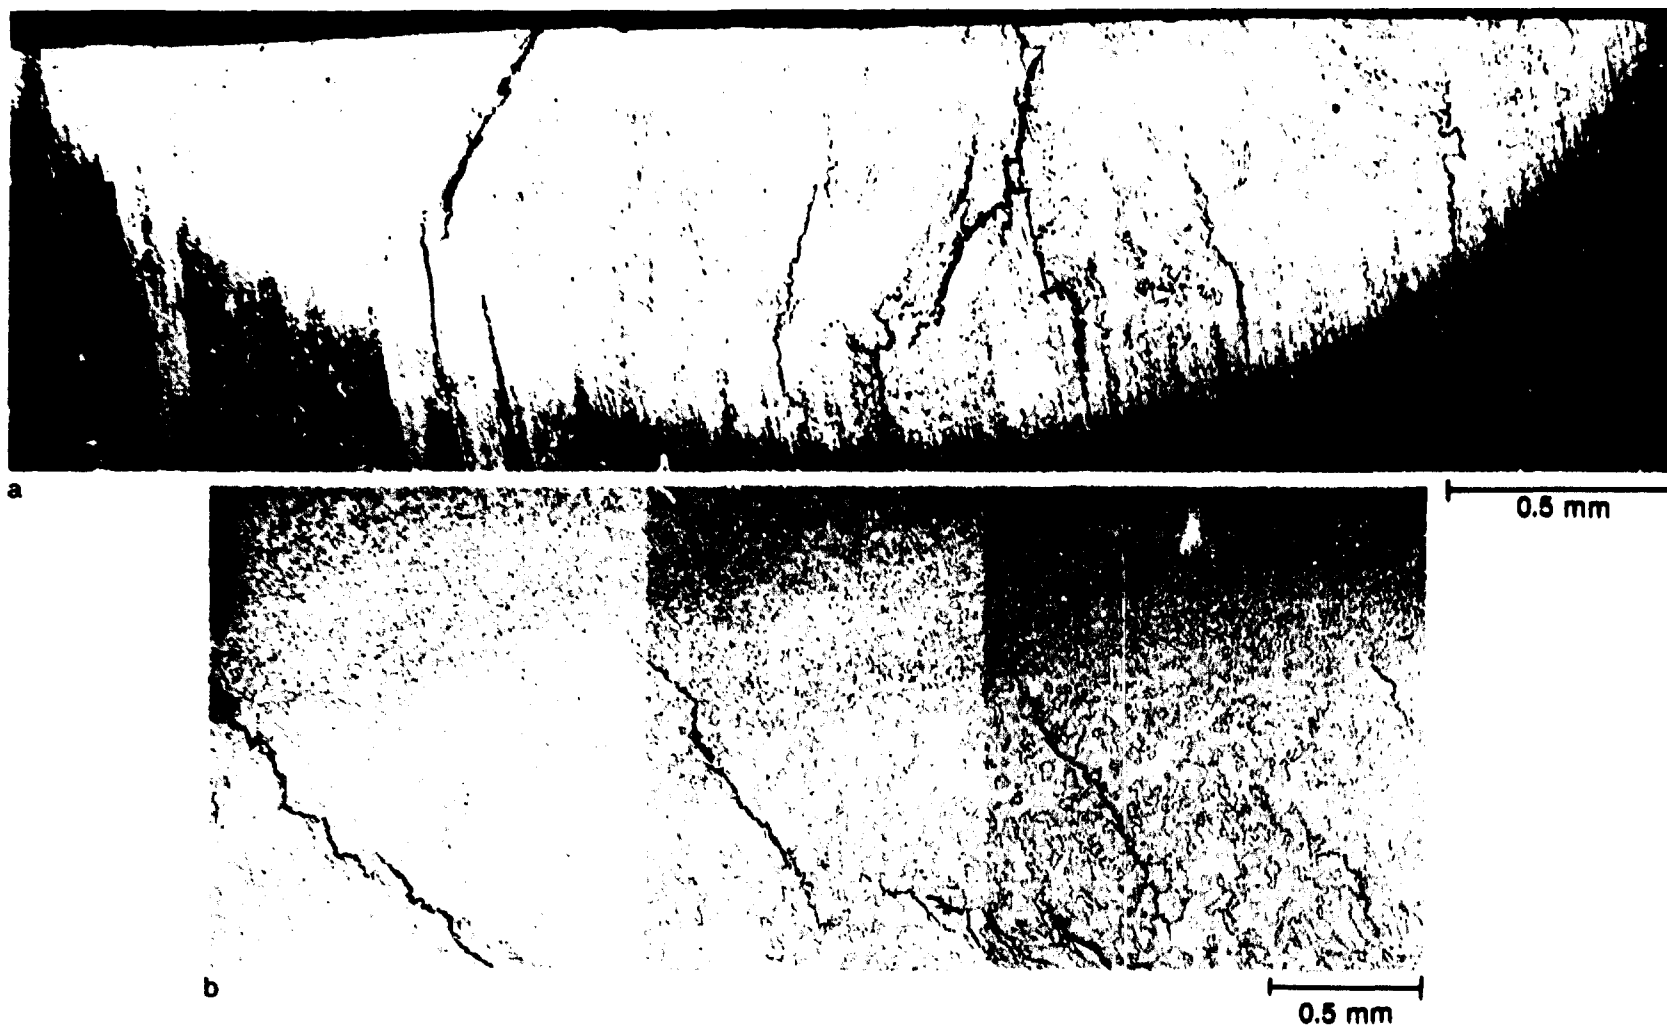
Welds in 0.25% Zr modified IC-218 al'oy: (a) as-rolled, showing HAZ liquation cracks extending into the fusion zone; (b) after 1100°C/1 h heat treatment, showing lack of HAZ cracking and arrest of fusion zone cracks at the fusion line.
